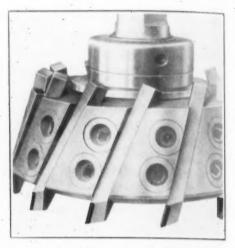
Milling Cutter with Inserted Tungsten Carbide Tipped Teeth.
